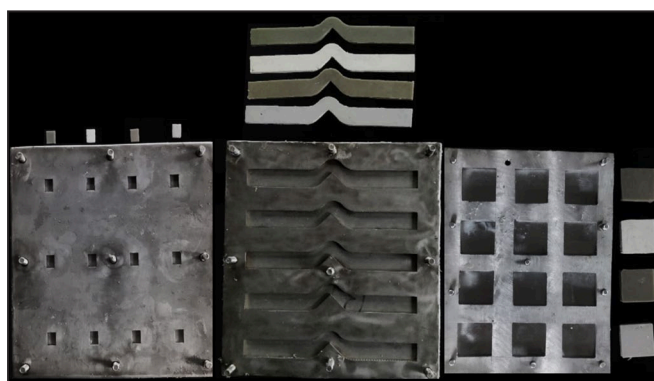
Stainless steel mold for colour specimen, tear strength testing specimen, and harness testing specimen fabrication (left to right) along with specimen of each group.
